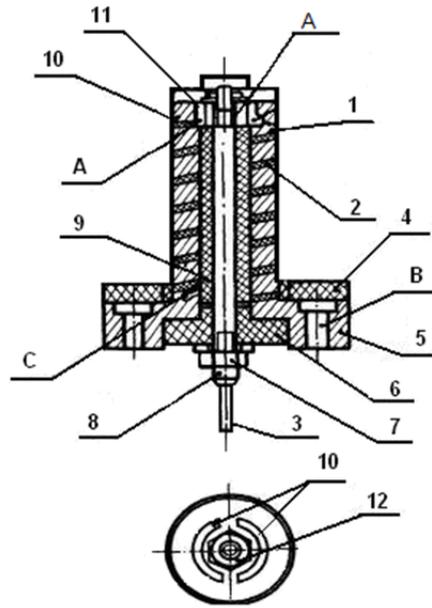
Construction of inductor for expanding: 1 – inductor’s spiral, 2 - isolation; 3 – pin; 4 - flange; 5 - flange; 6 - holes, 7 -bushing; 8 - screw-nut; 9 - rod; 10 - bushing; 11 – cam slot; 12 - flange; 13 - screw-nut; 14 - hole; a, b, c - through holes
